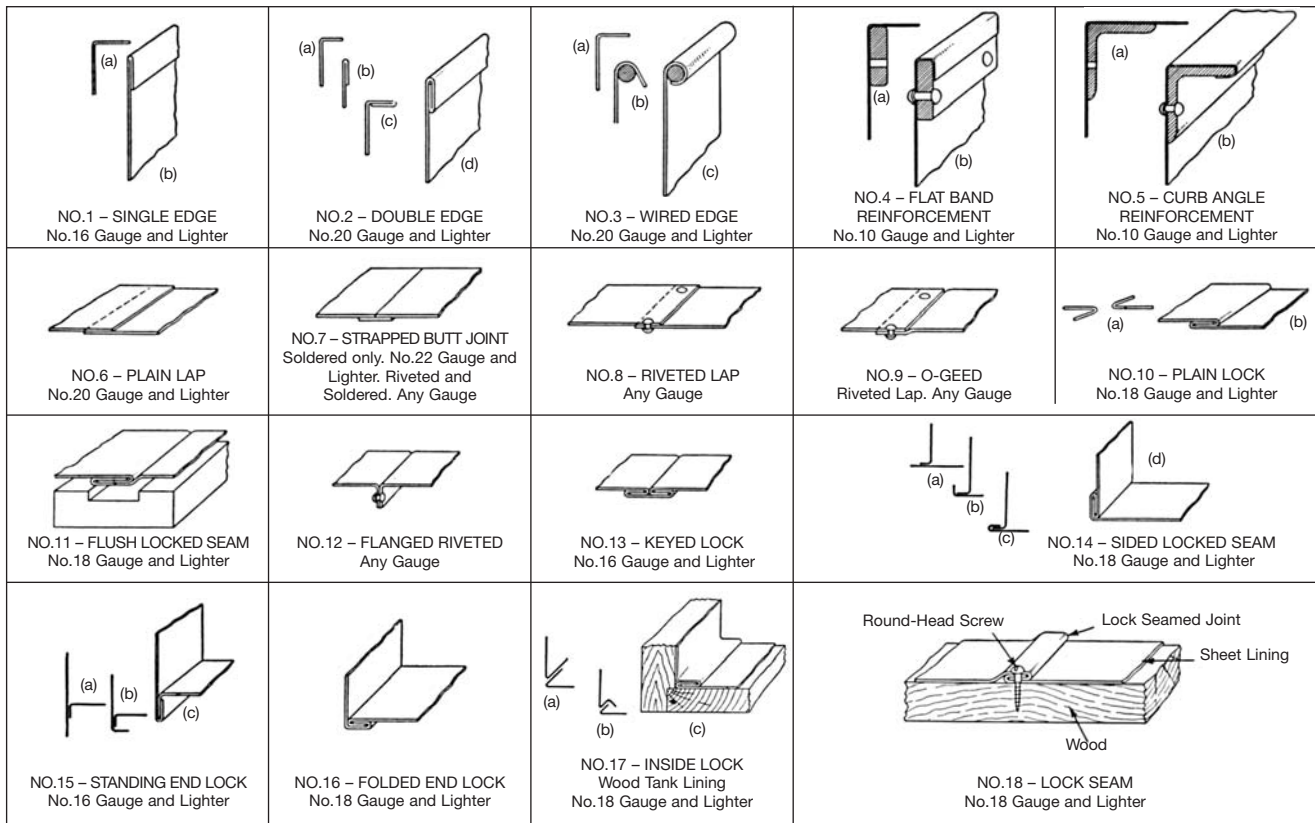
Mechanical joints and edge reinforcements used for joints to be soldered.
